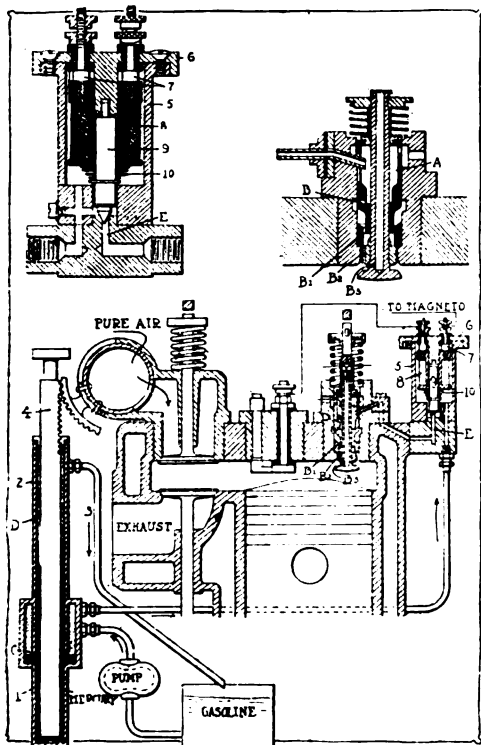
General drawing of motor, showing the detail of the distributor with its magnetic coils, the pulverizer and the pressure-controlling device with its column of mercury. The fuel is carried from the tank to the pressure regulator by means of a pump placed in the position shown in the illustration.
